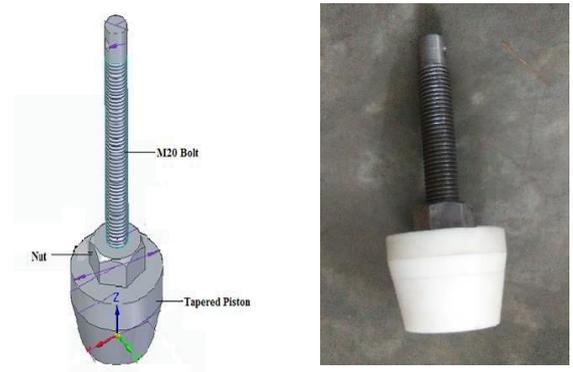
Extruder cum compression Piston rod of Compression Cum Extruder Die Type Equipment
